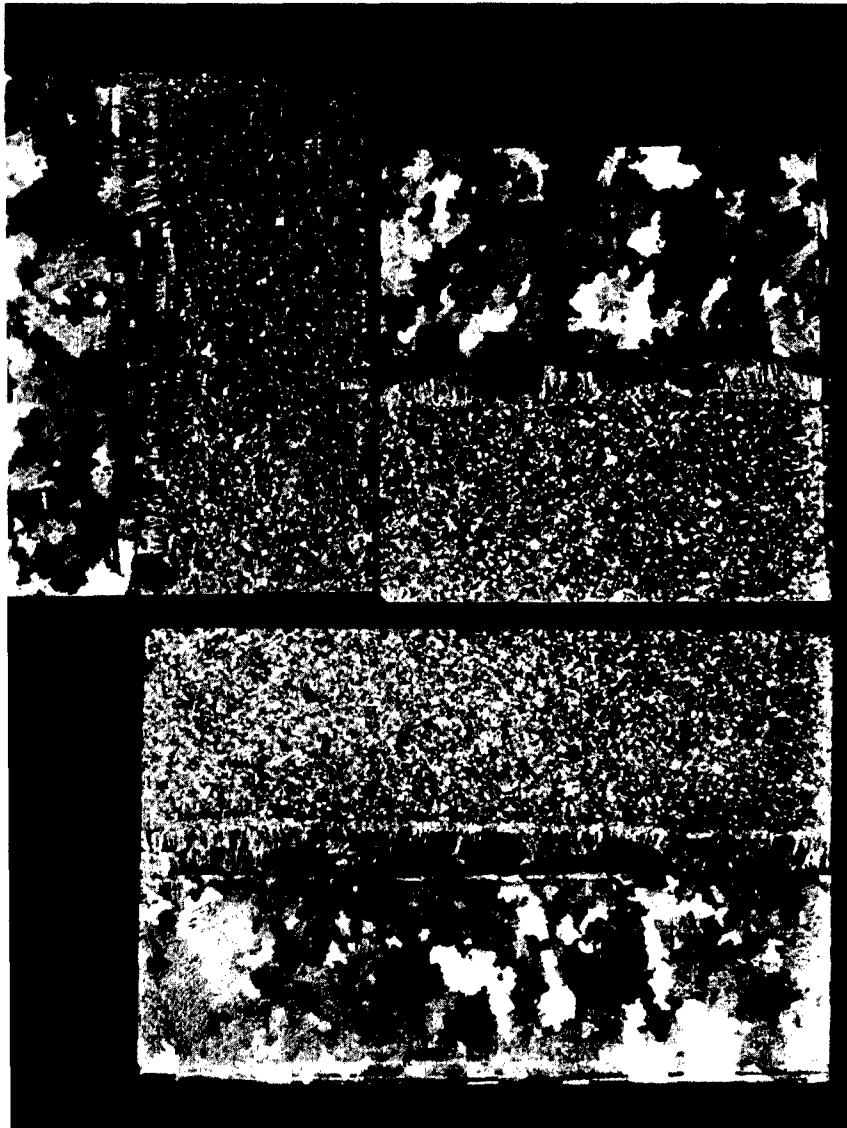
Weld With Ceramic-Filled U-700 Blocks After Ceramic Removal (Direction of Weld - Parallel to Interface).
